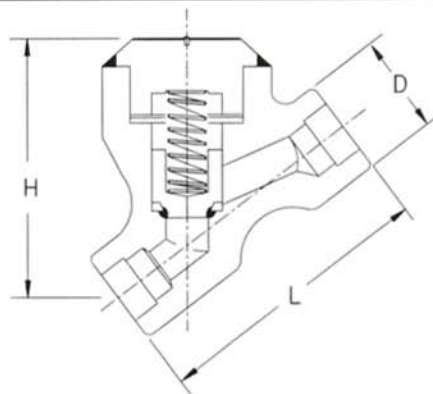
S-FS3 - WB - Y Class 1500 (Socket Weld)
